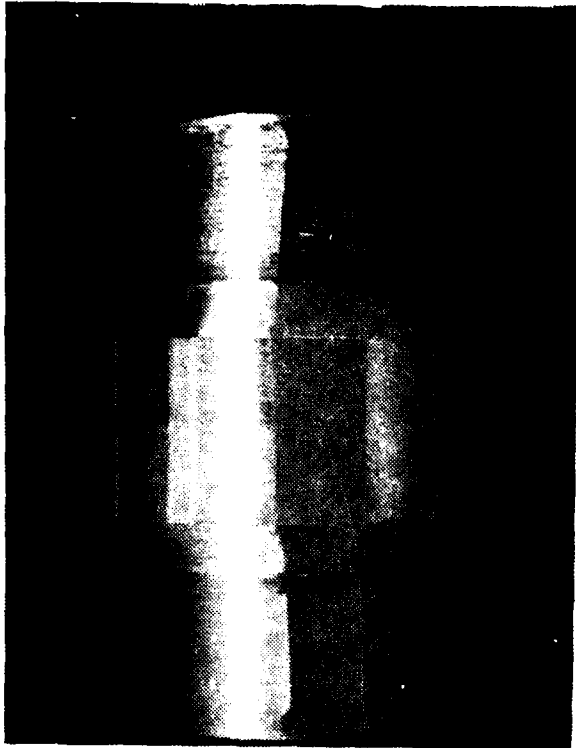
Tubular Steel Specimen, aluminum collar, about half painted, as received.
